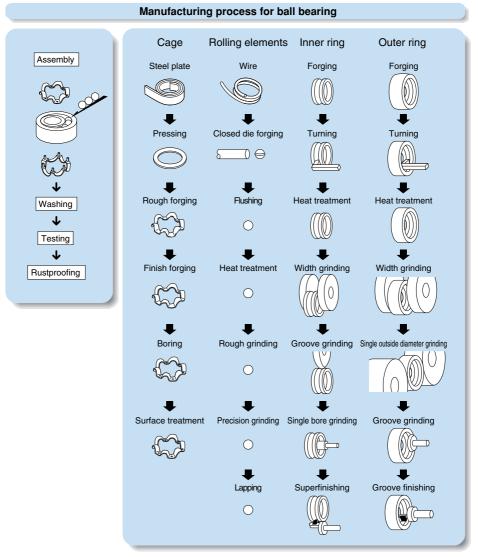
Deep Groove Ball Bearing Manufacturing Process
